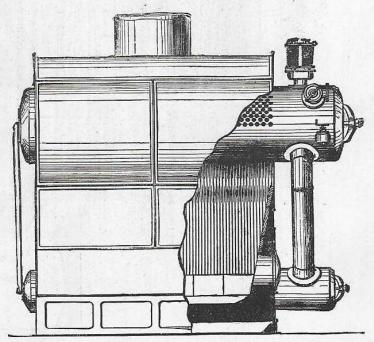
WATER TUBE BOILER, Larger Type (Messrs Thornycroft).
